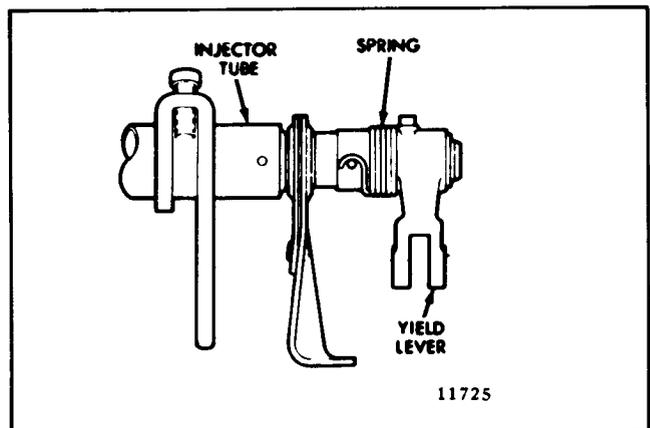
Throttle Delay Yield Lever (In-line Engine)
